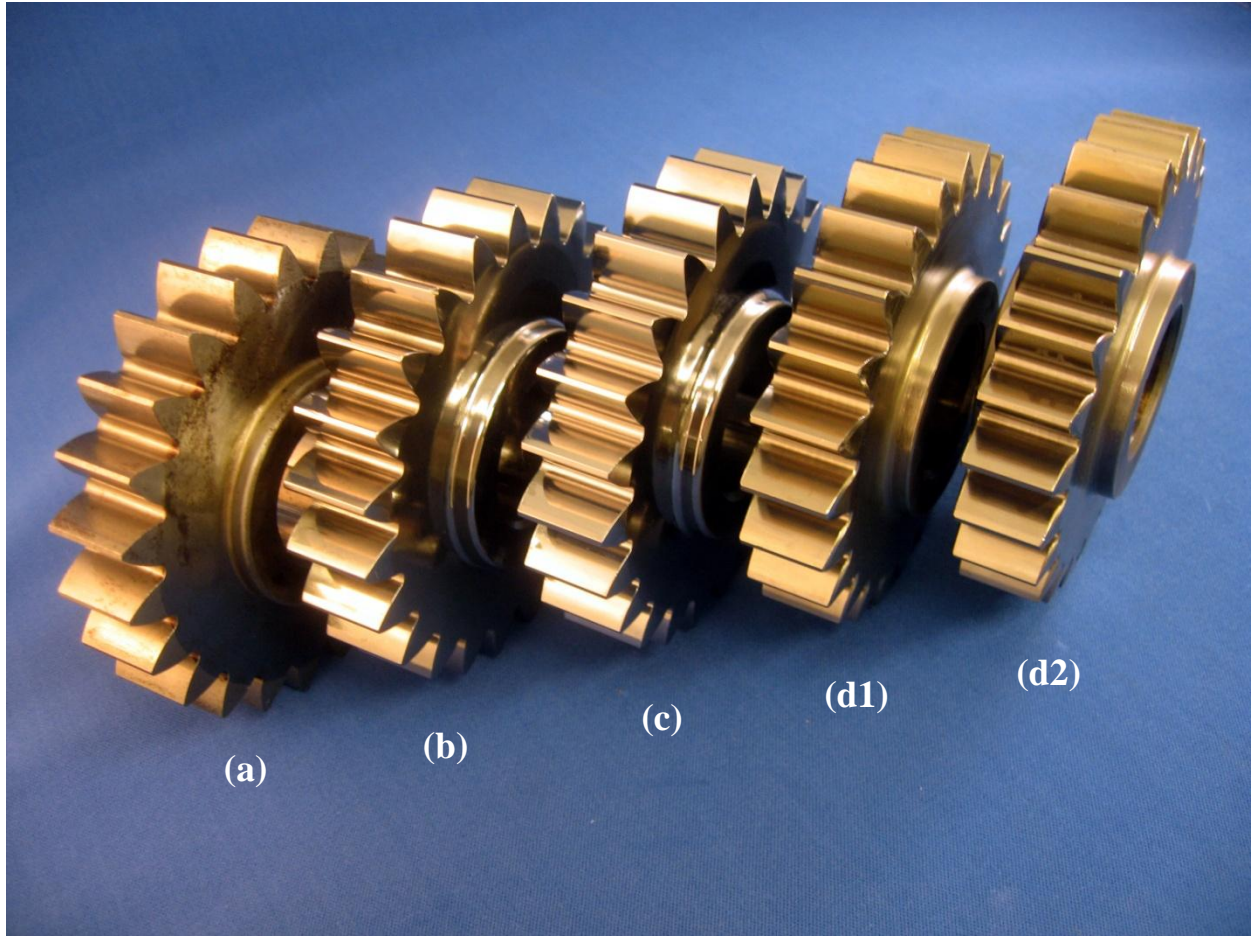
Examples of 23 tooth test gears used in this study: (a) G, (b) CP, (c) HP, and (d1, d2) NiB-coated gears.
